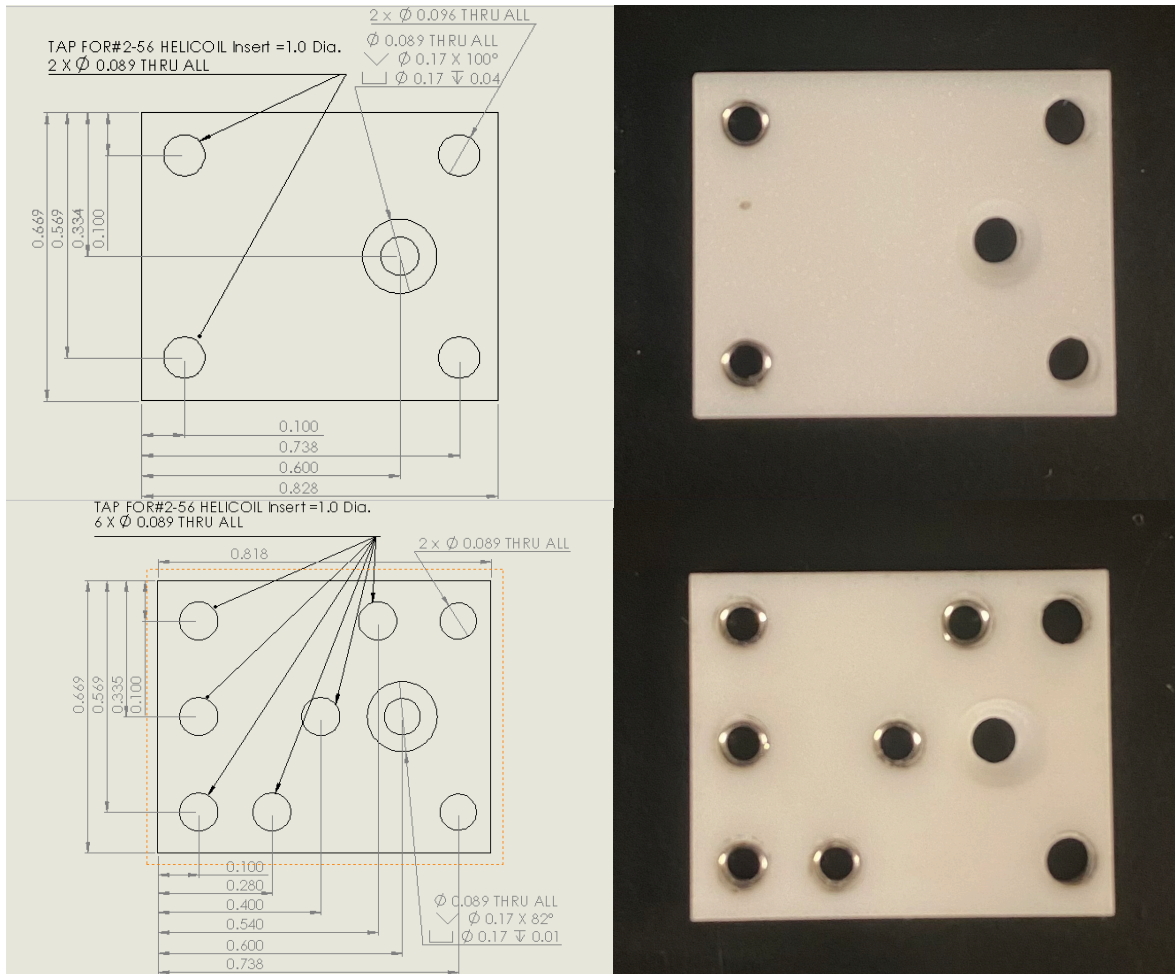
Geometry of the Macor pieces, number units are in Inches
